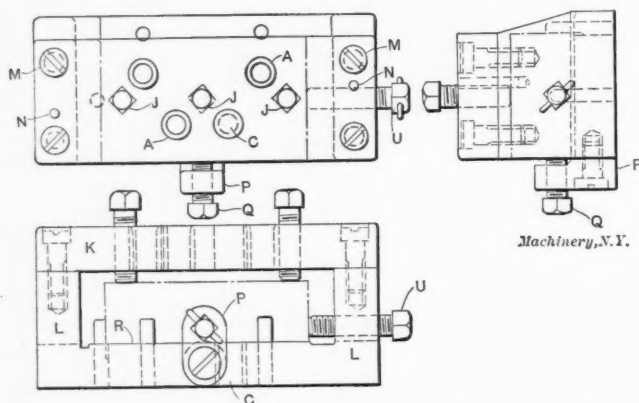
Further Improvements in Jig, suiting it to Manufacturing Purposes.
